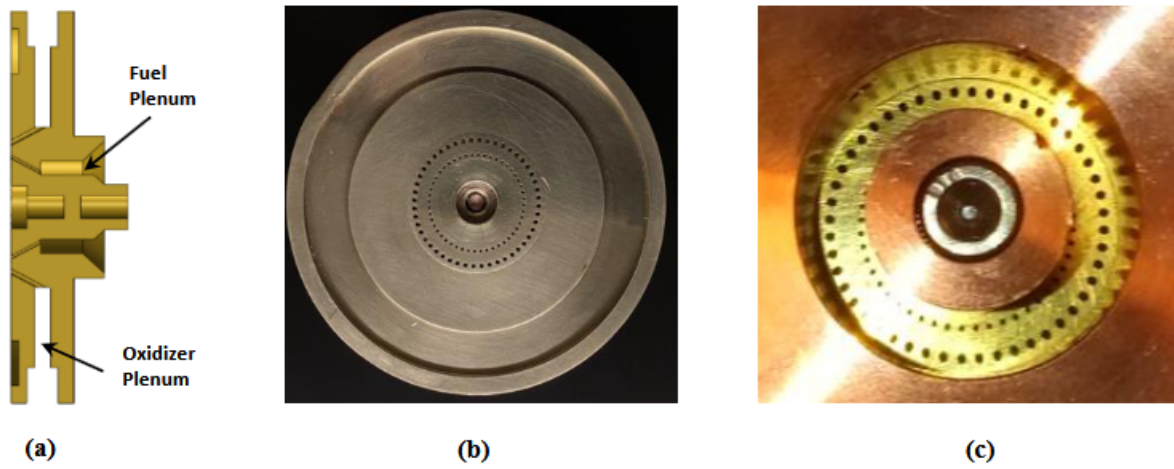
25 mm RDE injector. a) Cross-sectional view; b) Front face; c) Front face when installed, shown with the 15 mm inner core (5 mm gap) [21].
